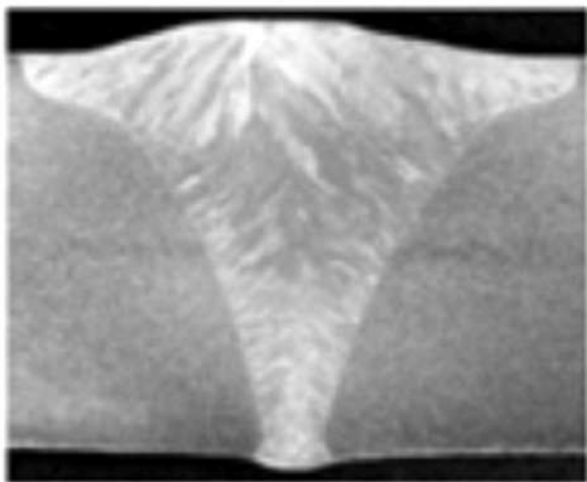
K -TIG Weld (Courtesy : K-TIG Australia)
